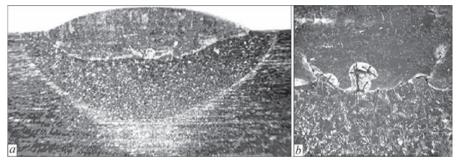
Macrosection of joint, deposited by a filler wire VT22 on substrate of VT22 alloy (a) and macrodefects in fusion zone (b)
